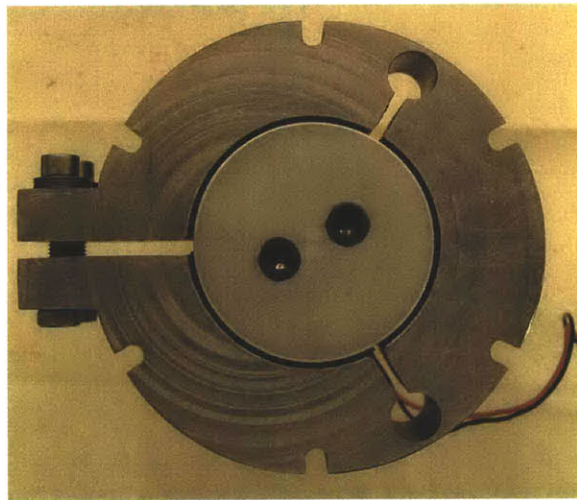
Top view of shear test assembly of sample holder, rubber sample and target shaft.
